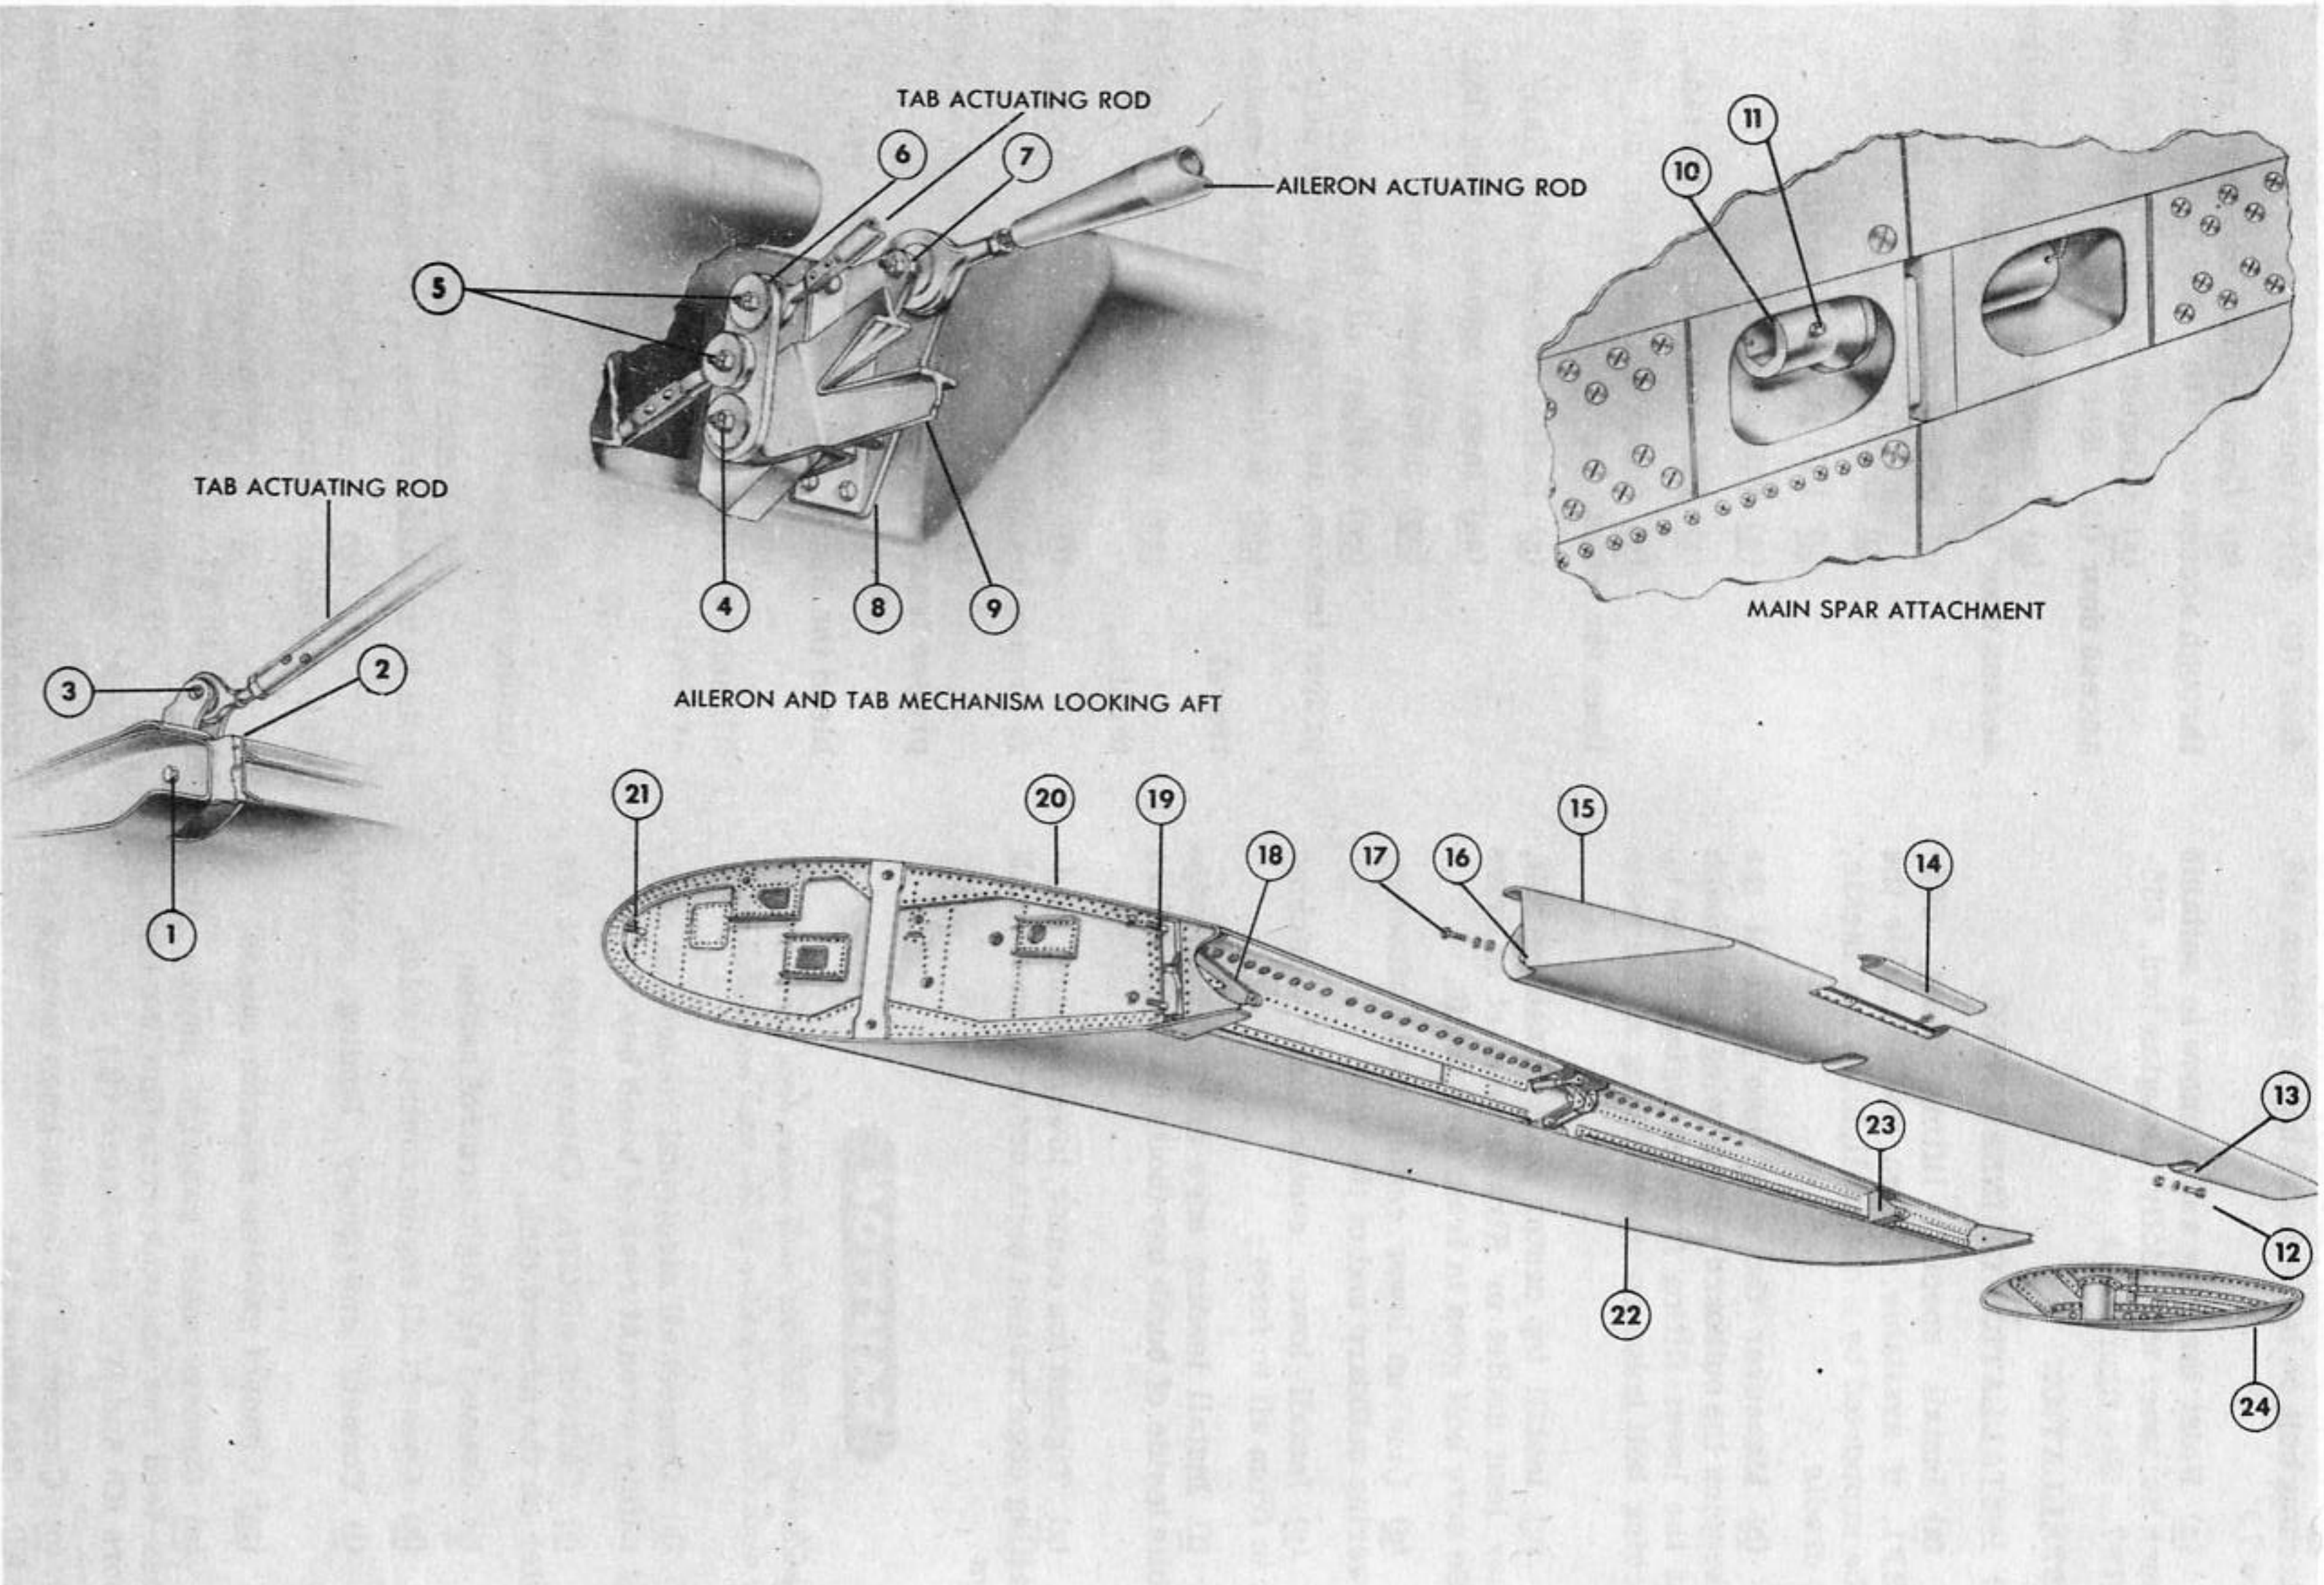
OUTER WING ASSEMBLY AND INSTALLATION
